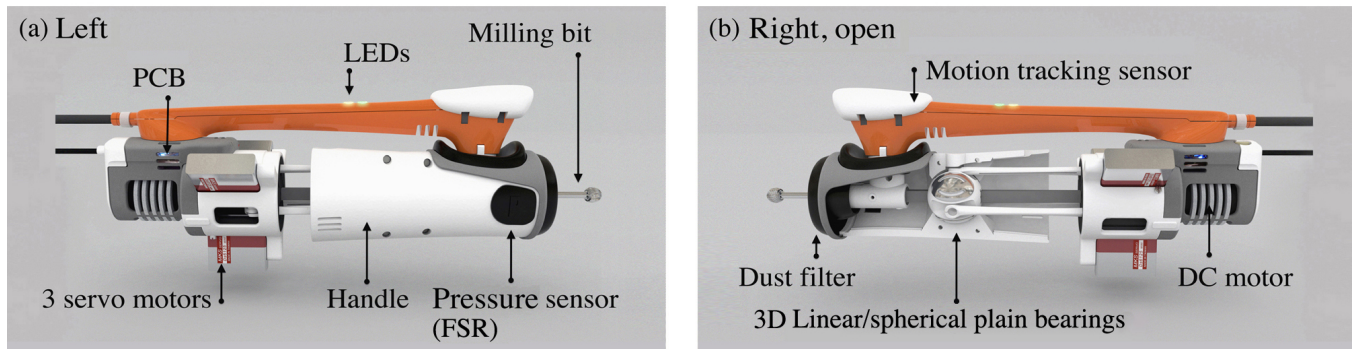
FreeD V2 is a handheld digital milling tool: (a) a left view of the tool, with its main components, and (b) a right view of the opened device.
